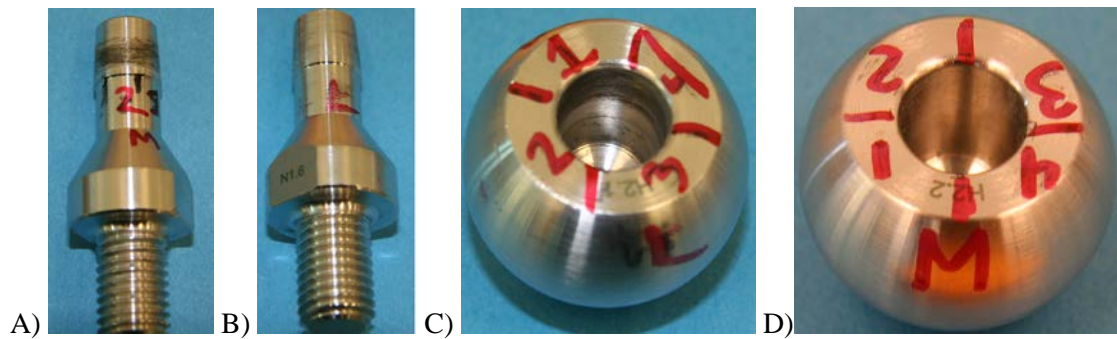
Corrosion and fretting damage of the head and neck tapers after fatigue testing for a 36 mm femoral head that received out of axis fatigue loading. A) Neck taper on the medial side. B) Neck taper on the lateral side. C) Femoral head taper on the medial side. D) Femoral head taper on the lateral side.
